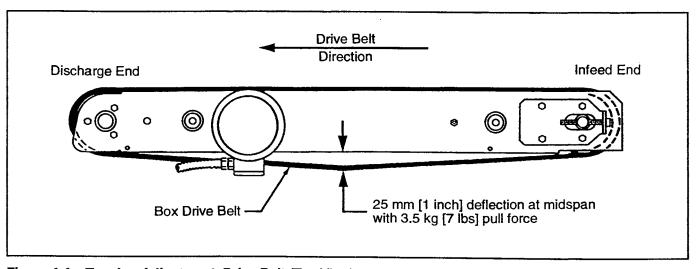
Tension Adjustment, Drive Belt (Top View)
